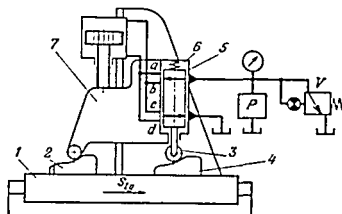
Hydraulic servomechanism circuit for a tracer-controlled milling machine
